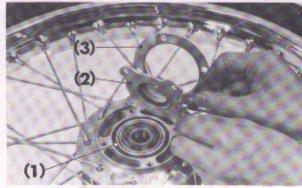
(1) O-ring (2) Gear box retainer (3) Retainer cover
